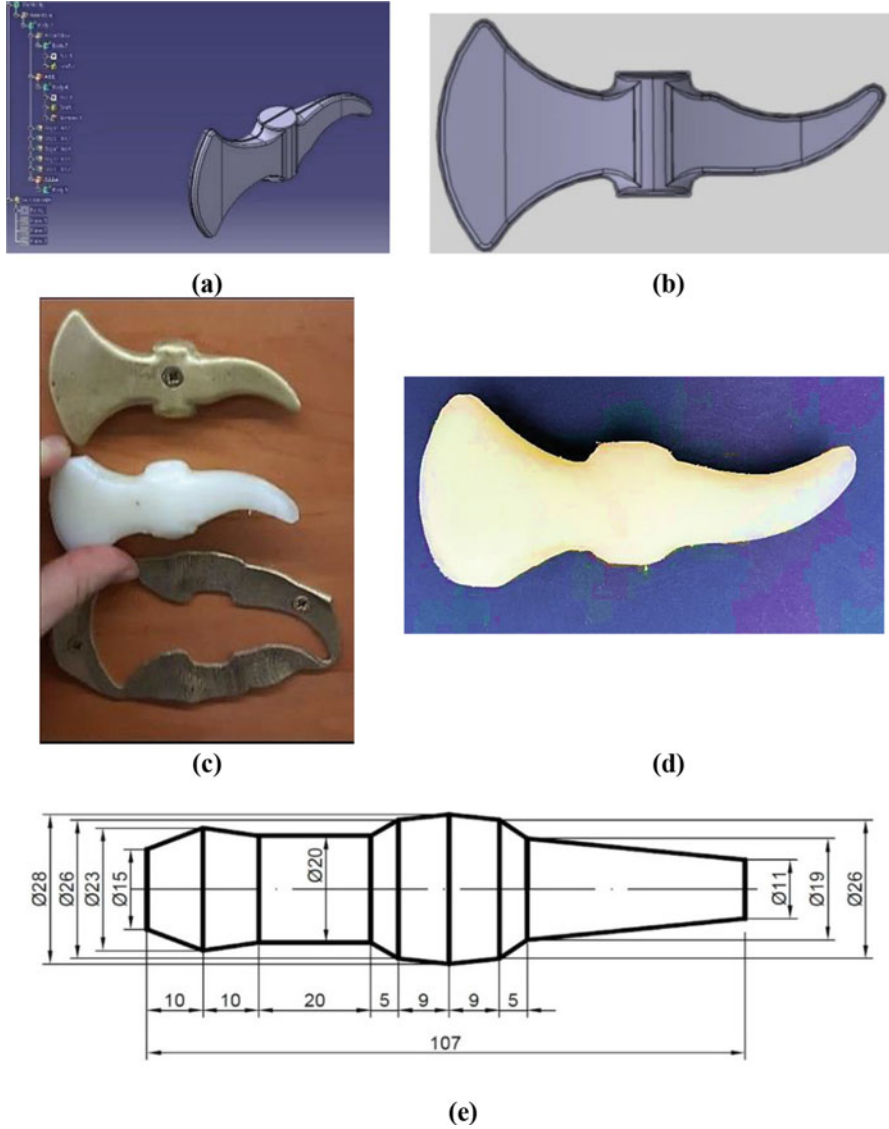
A view of hatchet (own work): (a) geometry of forging in AutoCAD 2022 Edu software, (b) front view, (c) upper die-workpiece, (d) finished product, (e) forging preform
